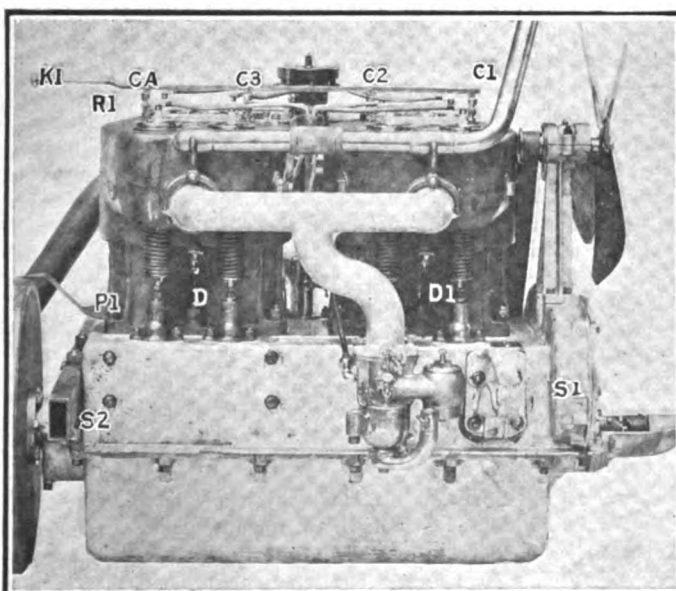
Intake side of motor, showing substantial supporting members, carbureter and cocks to drain water from jackets
